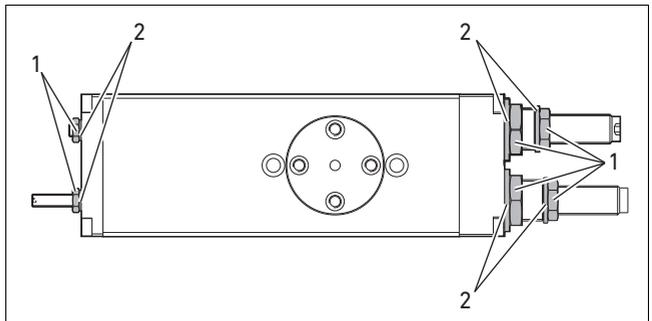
Changing the sealing rings on the RCM rotary compact module
